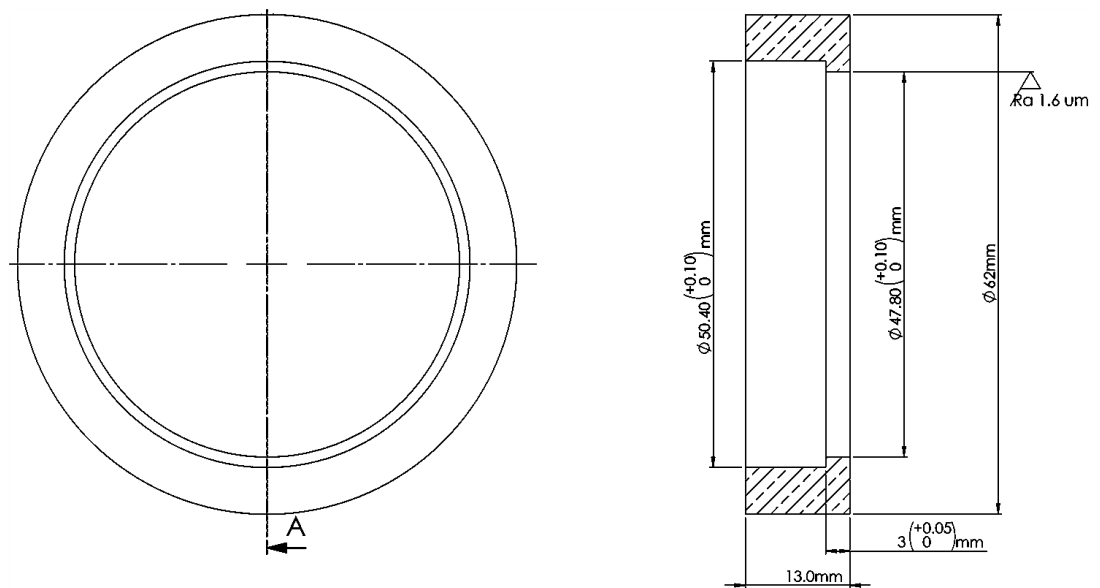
Technical drawing of the welded stainless steel ring.
